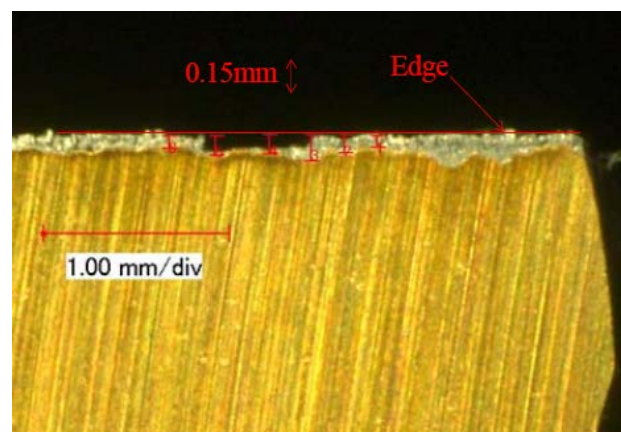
Photograph of edge of the drill for the judgment of the tool life
